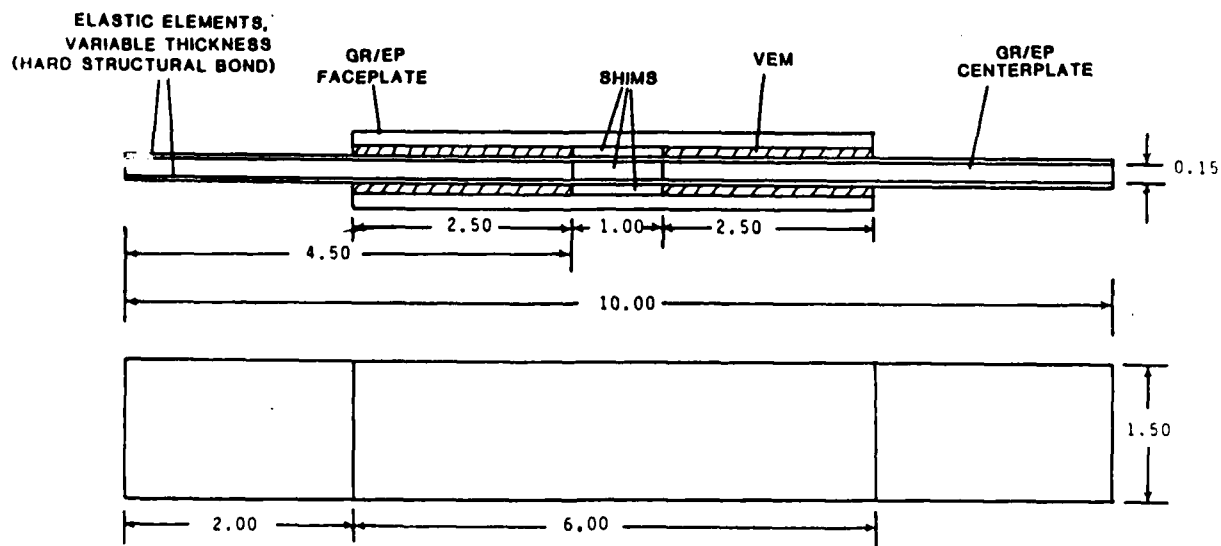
Passively Damped Joint Specimen With Elastic Elements
